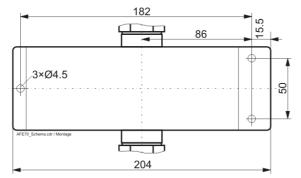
Schematic illustration of the mounting holes of the Automatic Purging Units Series AFE70
